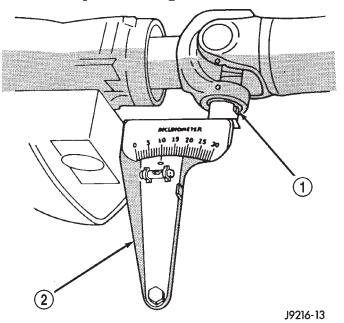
Front (Output) Angle Measurement (A) 1 – SLIP YOKE BEARING CAP
